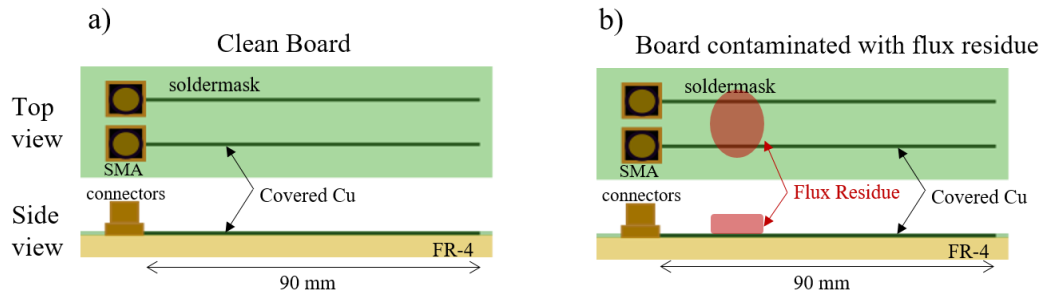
Schematic top and side view representation of sample with solder mask covered Cu traces on FR-4 laminate for bare board reference (a) and board contaminated with flux residue at approx. 40 mm distance to SMA connectors (b).
